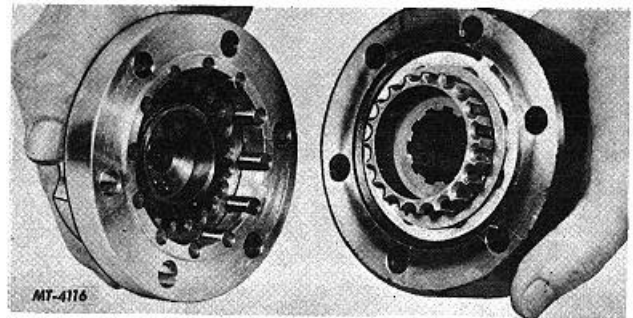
Clutch Body and Hub Body Properly Assembled (Lock-O-Matic)
